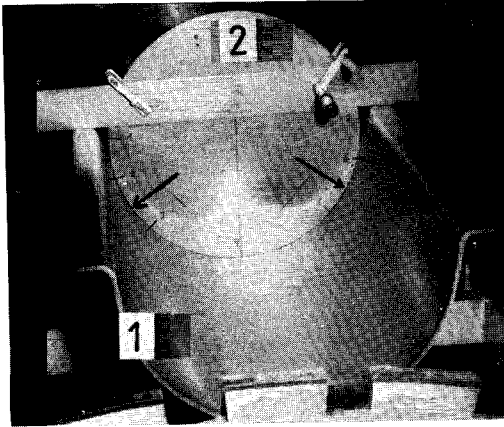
Steel Component (1) Dressed to Specified Tolerances, with Measuring Template (2)
